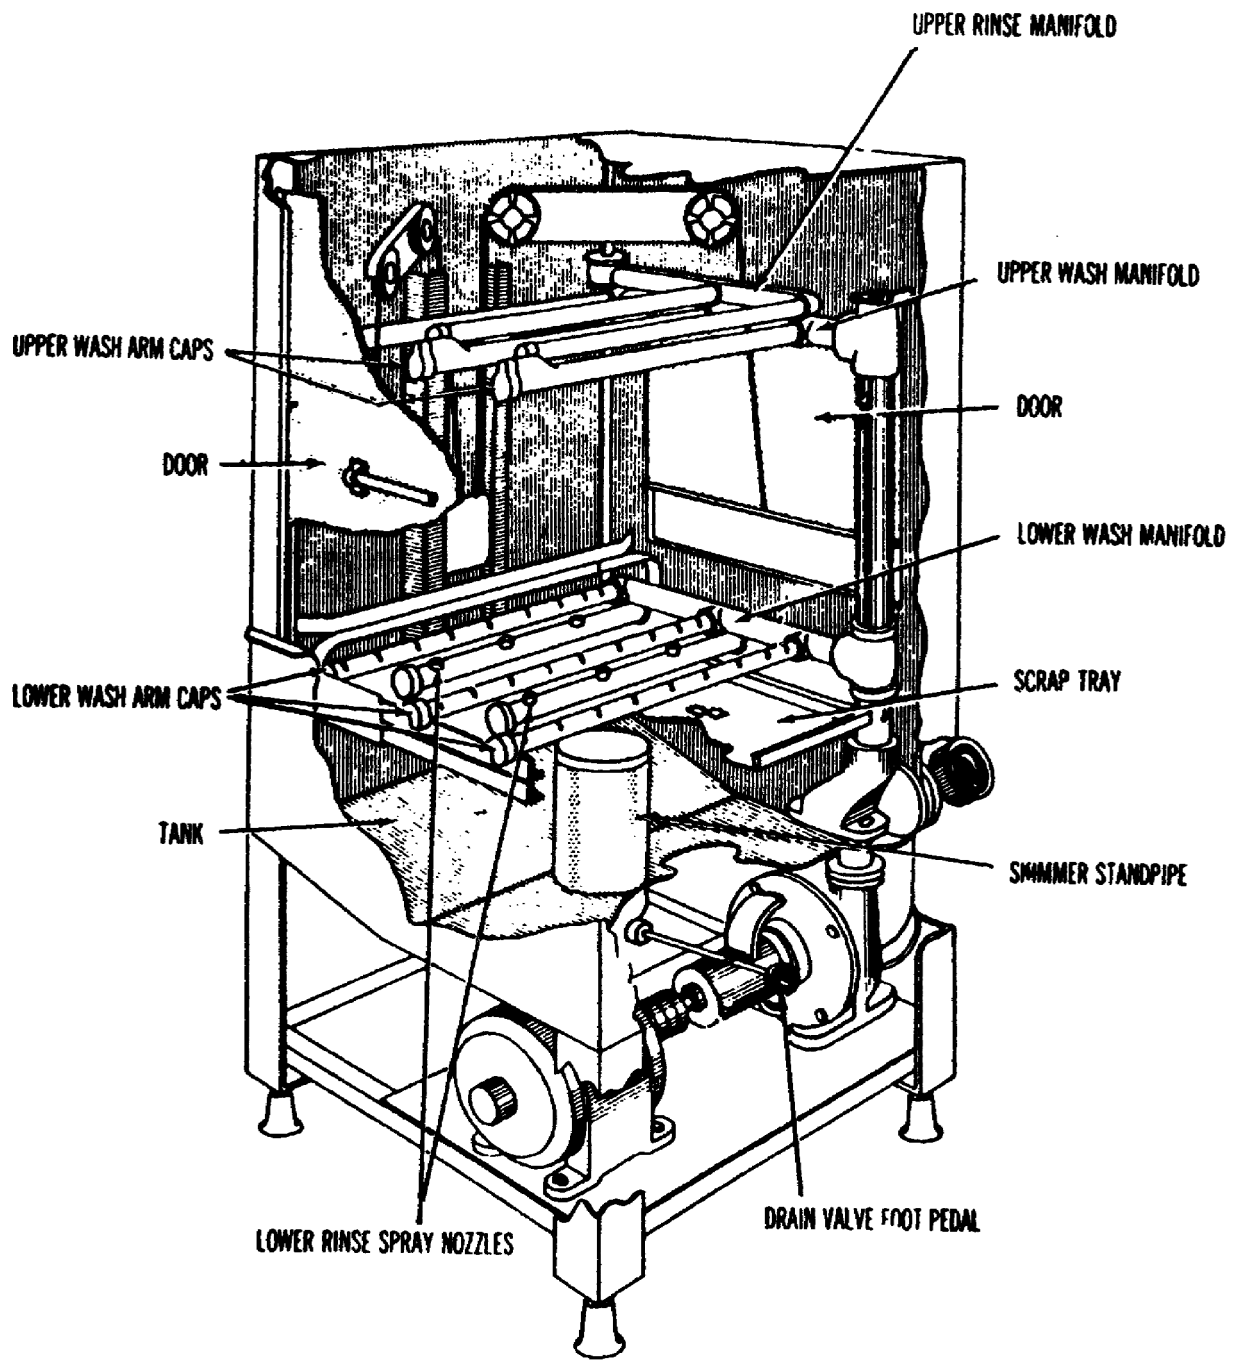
Cutaway diagram of a single-tank dishwashing machine
